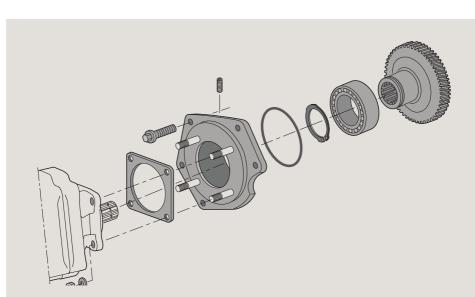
VP1-045/-060/-075 shown with a bearing supported gear on an engine PTO adapter (example).
